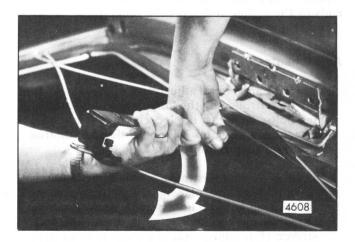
Rear Compartment Lid Removal - "11" Styles
